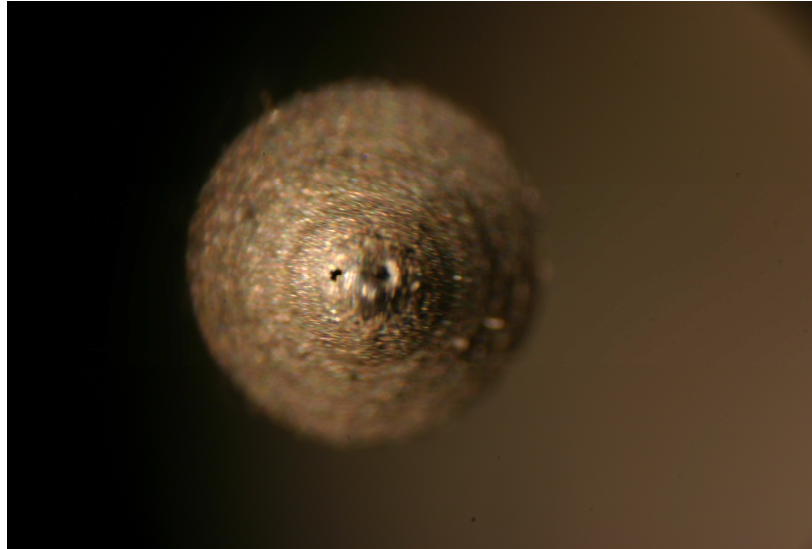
The nozzle hole location on the conical tip after EDM process
